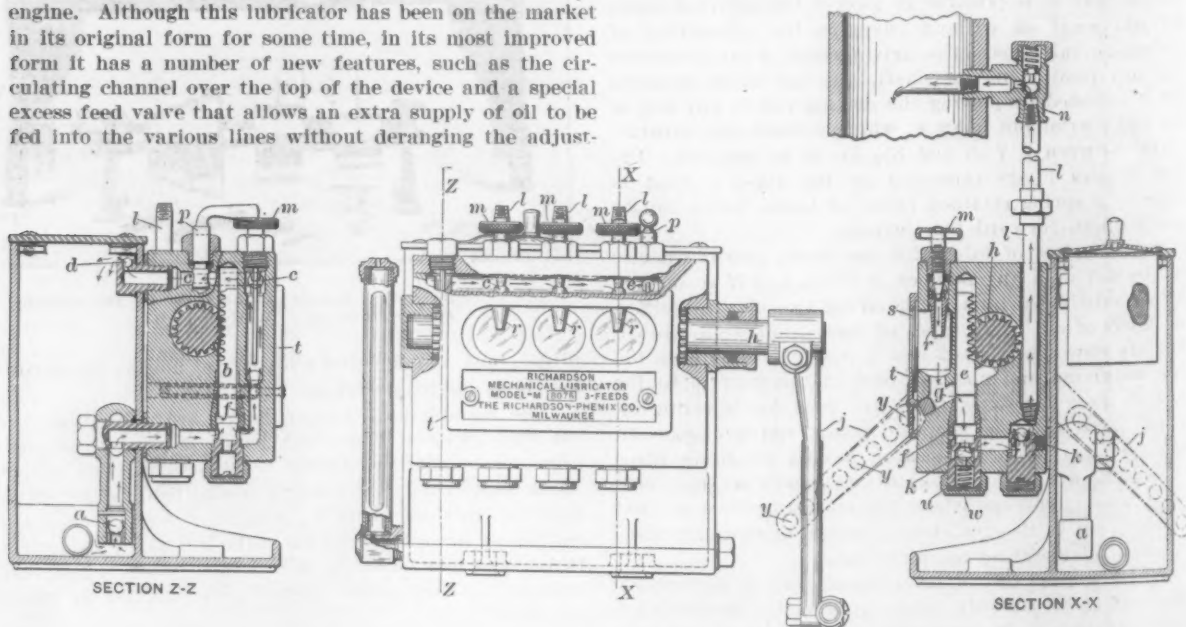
Constructional Details of a Three-Feed Lubricator.
